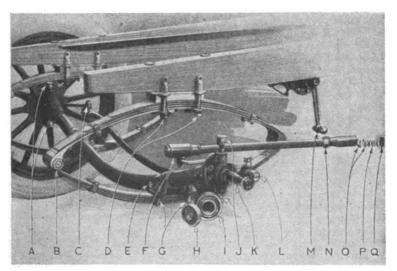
Franklin front axle. A—Grease cups for steering yoke pins. B—Spring pivot bolt. C—Steering connection. D—Upper spring-clip nuts. E—Lower spring-clip nuts. F—Steering connection. G—Lower spring clips. H—Outside thrust bearing. I—Inside thrust bearing. J—Grease cups for steering yoke pins. K—Steering knuckle. L—Steering connection. M—Steering-gear arm. N—Drag-link locknut. O—Bearing cups for ball connection. P—Steering connection spring. Q—Steering-connection adjusting screw
